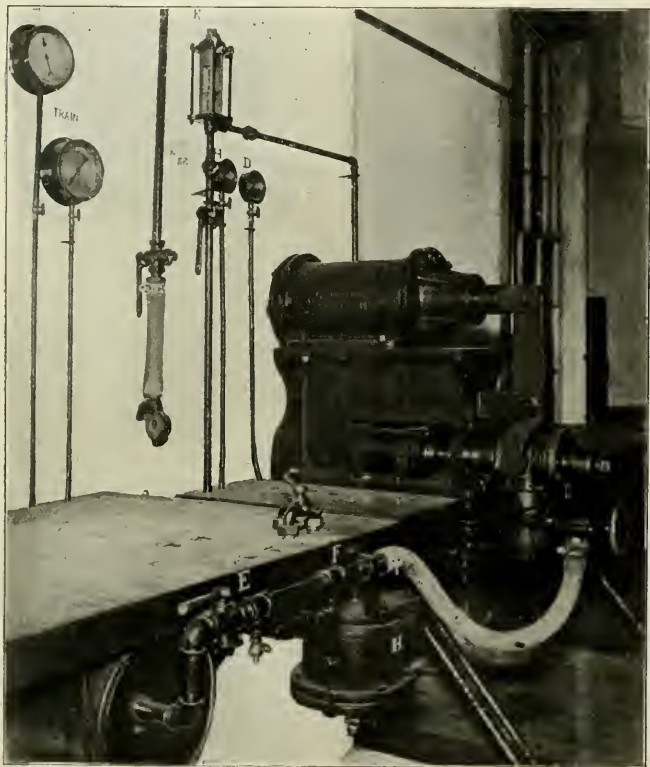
TRIPLE VALVE TESTING MACHINE, GREEN ISLAND SHOPS, DELAWARE & HUDSON RAILROAD.—COURTESY OF A. BUCHANAN, JR., MASTER MECHANIC.
